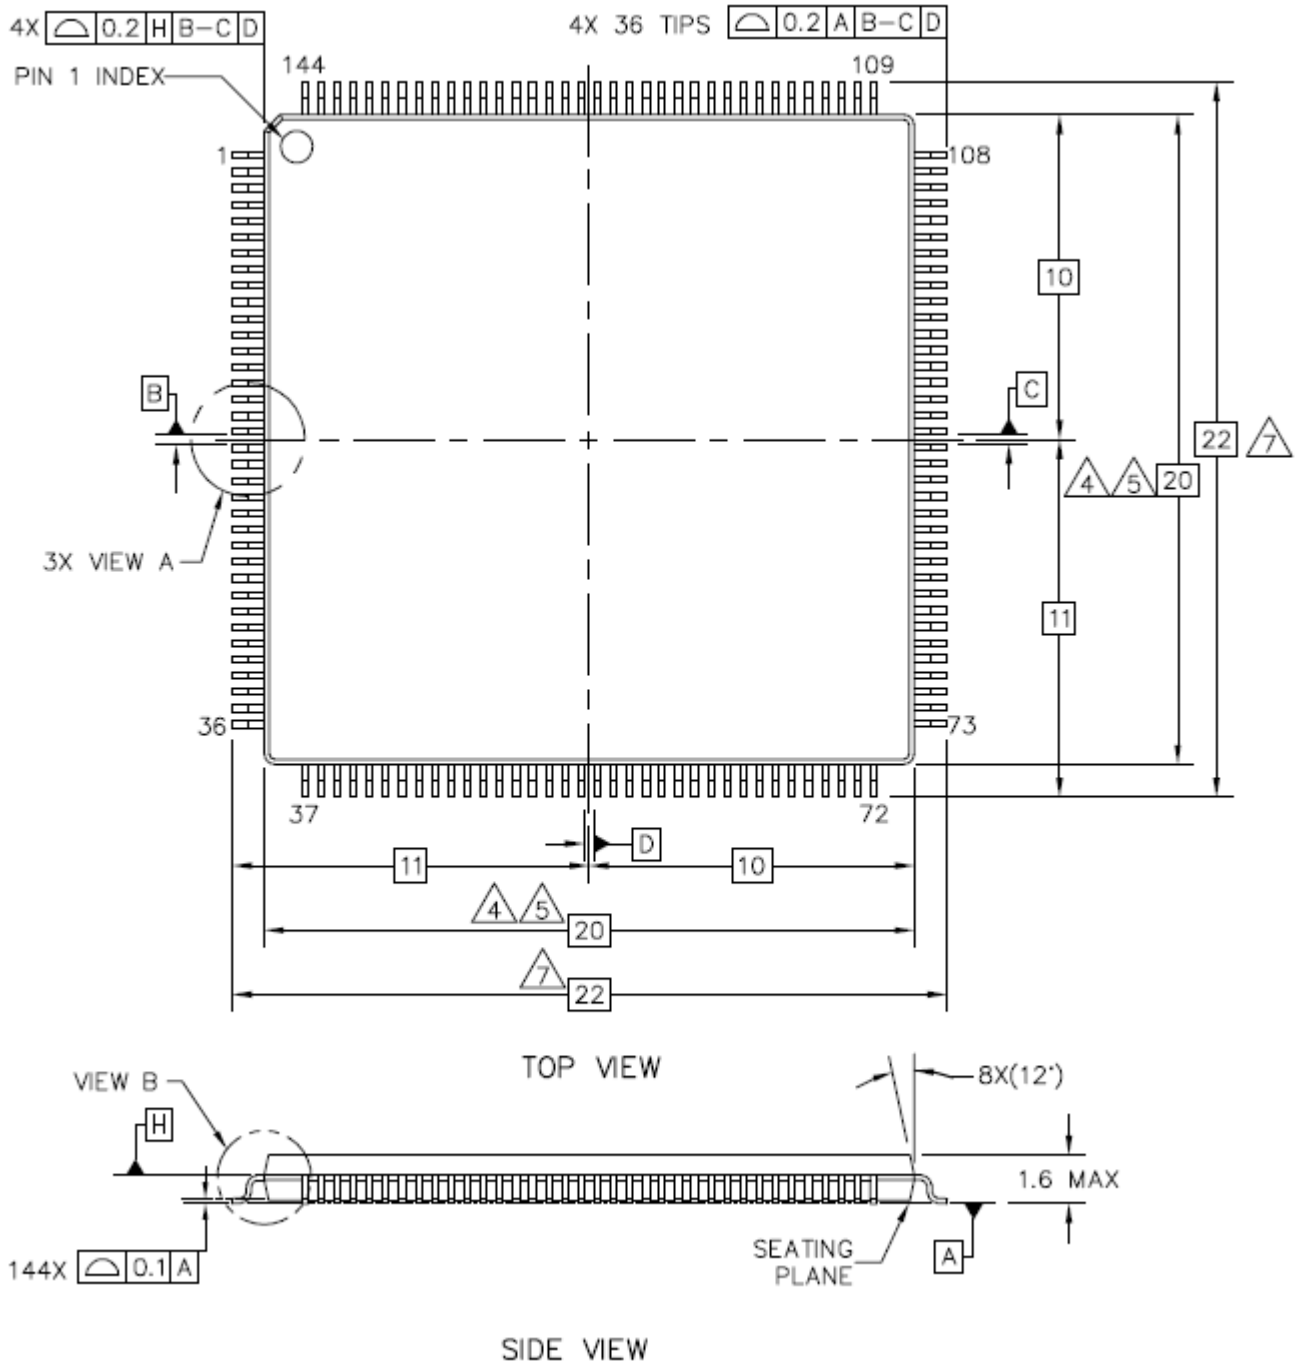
144-Pin Package Outline Drawing (1 of 2)
